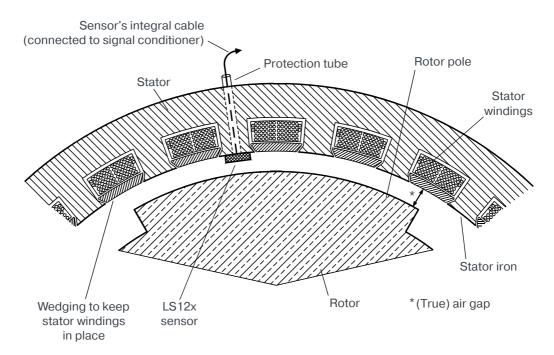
Cross-section of an electrical machine showing the sensor mounted on a stator iron
